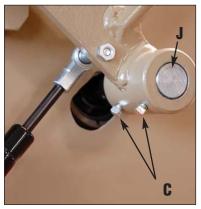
Square Head Screws "C" holding the Tensioner Pulley Shaft "J". Loosen these to remove the Tensioner Pulley Assembly.
